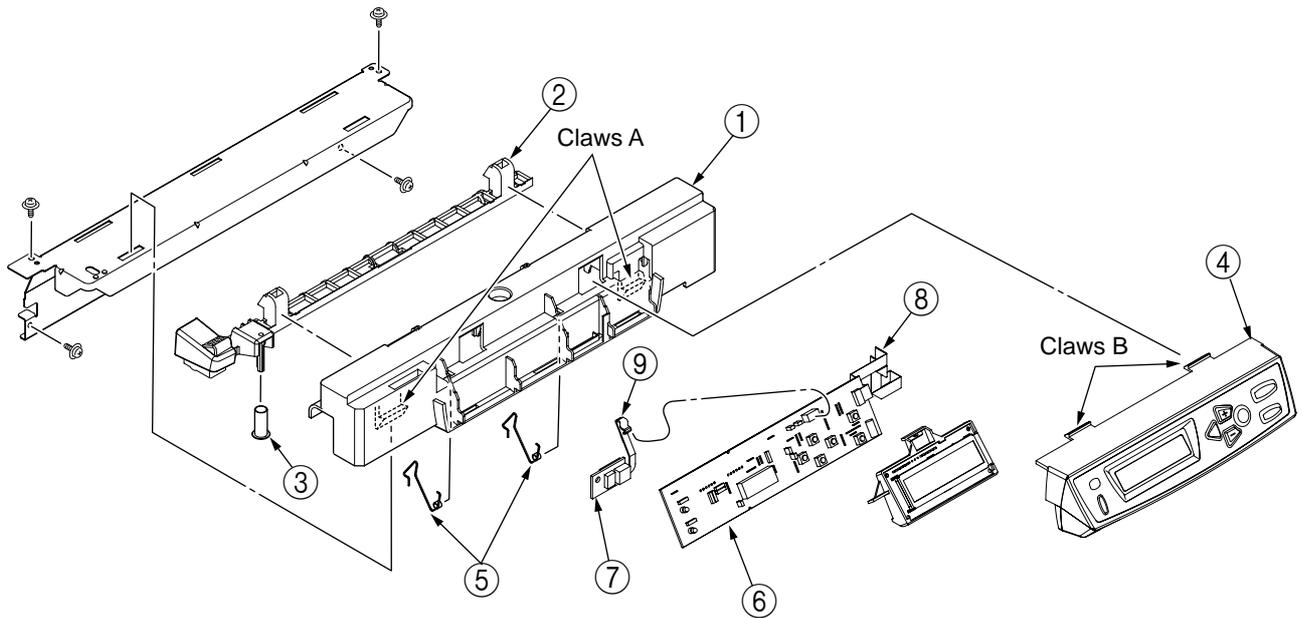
Board RSP / Environment Sensor / Top Cover Handle
